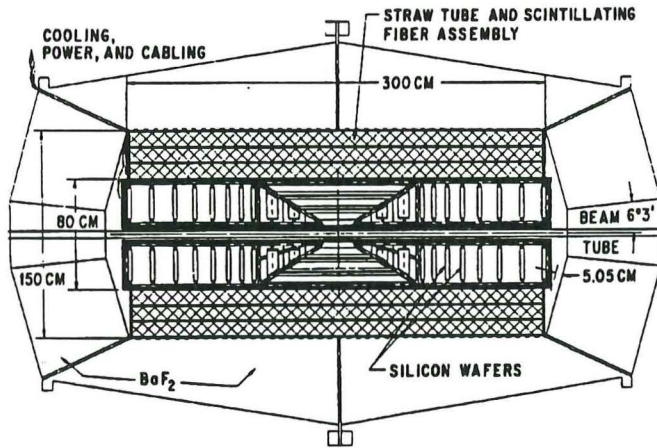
Elevation view of the design of the central tracker with support structures.
